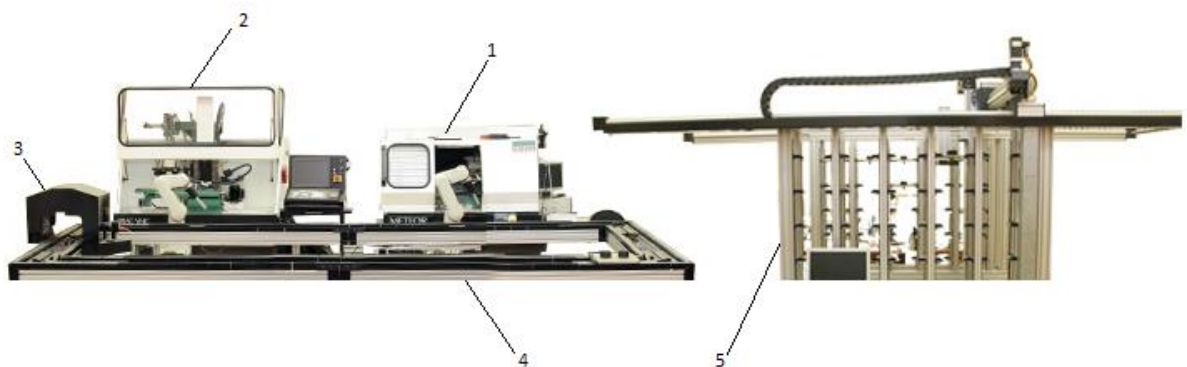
Mini FMS "Denford": 1-lathe module, 2-drilling and milling module, 3-product control module, 4-belt conveyor. 5-warehouse.
